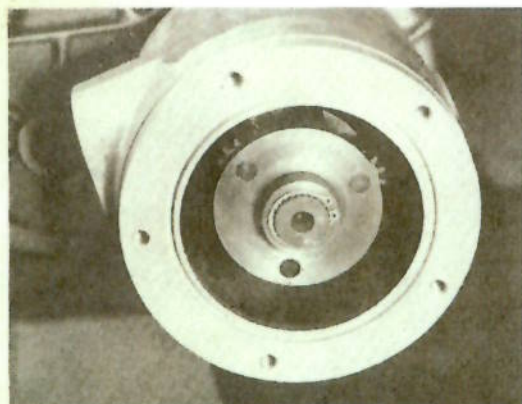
PINION GEAR CAGE ASSEMBLY SECURED ON INPUT SHAFT BY SNAP RING.
